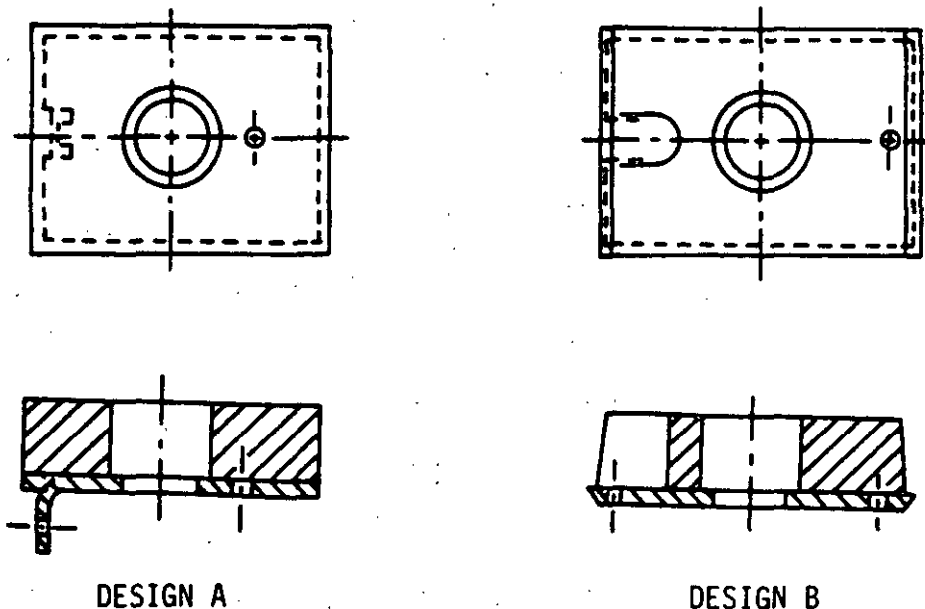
MOTOR MOUNTING PAD DESIGNS (51)
